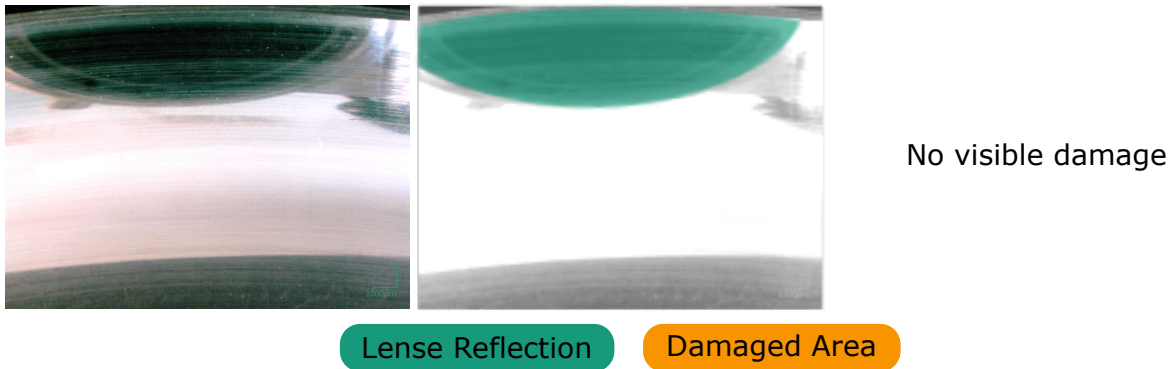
Exemplary raceway condition inner ring, Test ID 6, Bearing ID 0021
